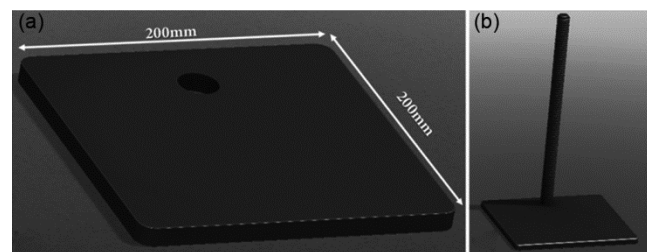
3D model of the designed dead weight rotator: (a) base plate and (b) lead screw
